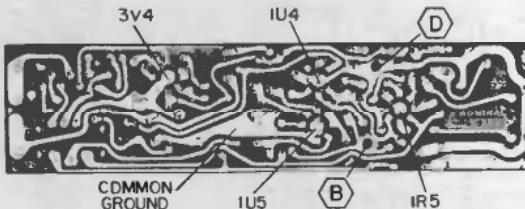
Bottom View of Chassis 4W2. Tube Locations and Alignment Points Shown.
